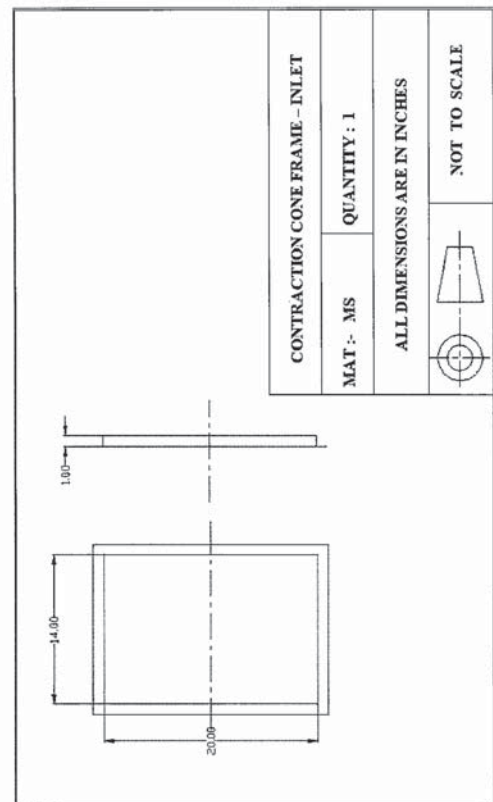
CAD DRAWING OF CONTRACTION CONE FRAME – INLET
